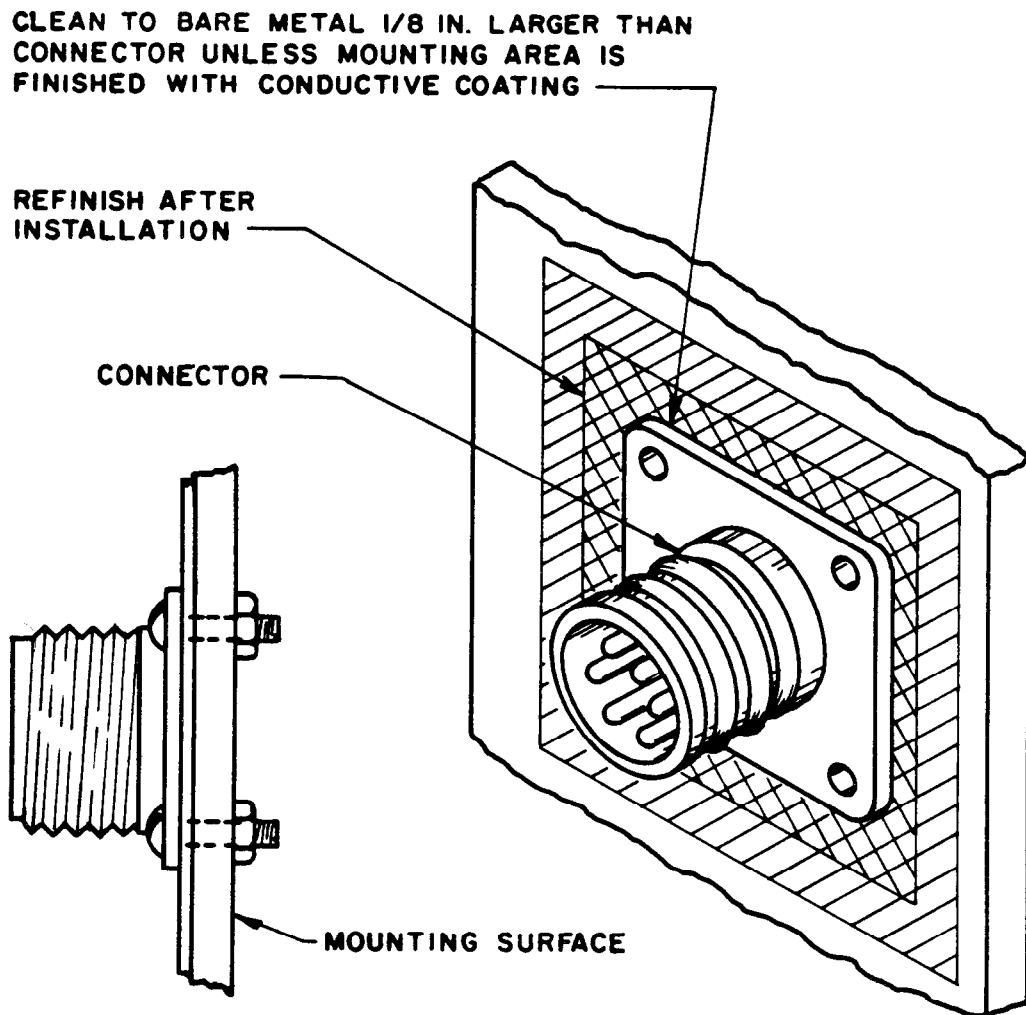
Bonding of connector to mounting surface. (Source: ref 5-6)
